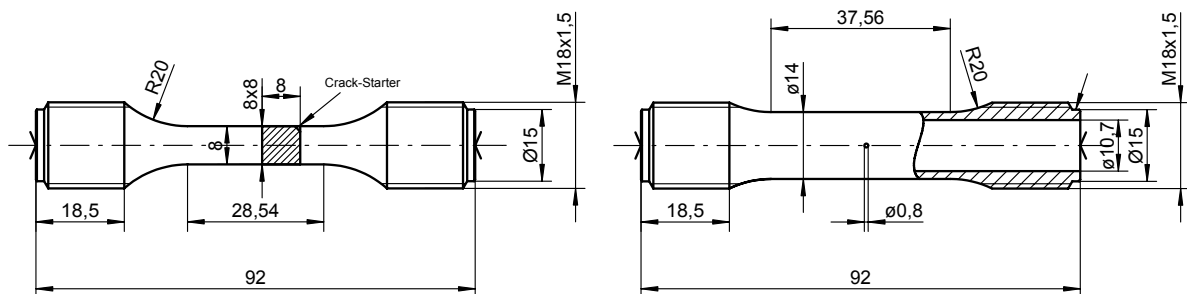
Specimen geometries: corner-crack- (left) and cross-drilled hollow-specimen (right)
